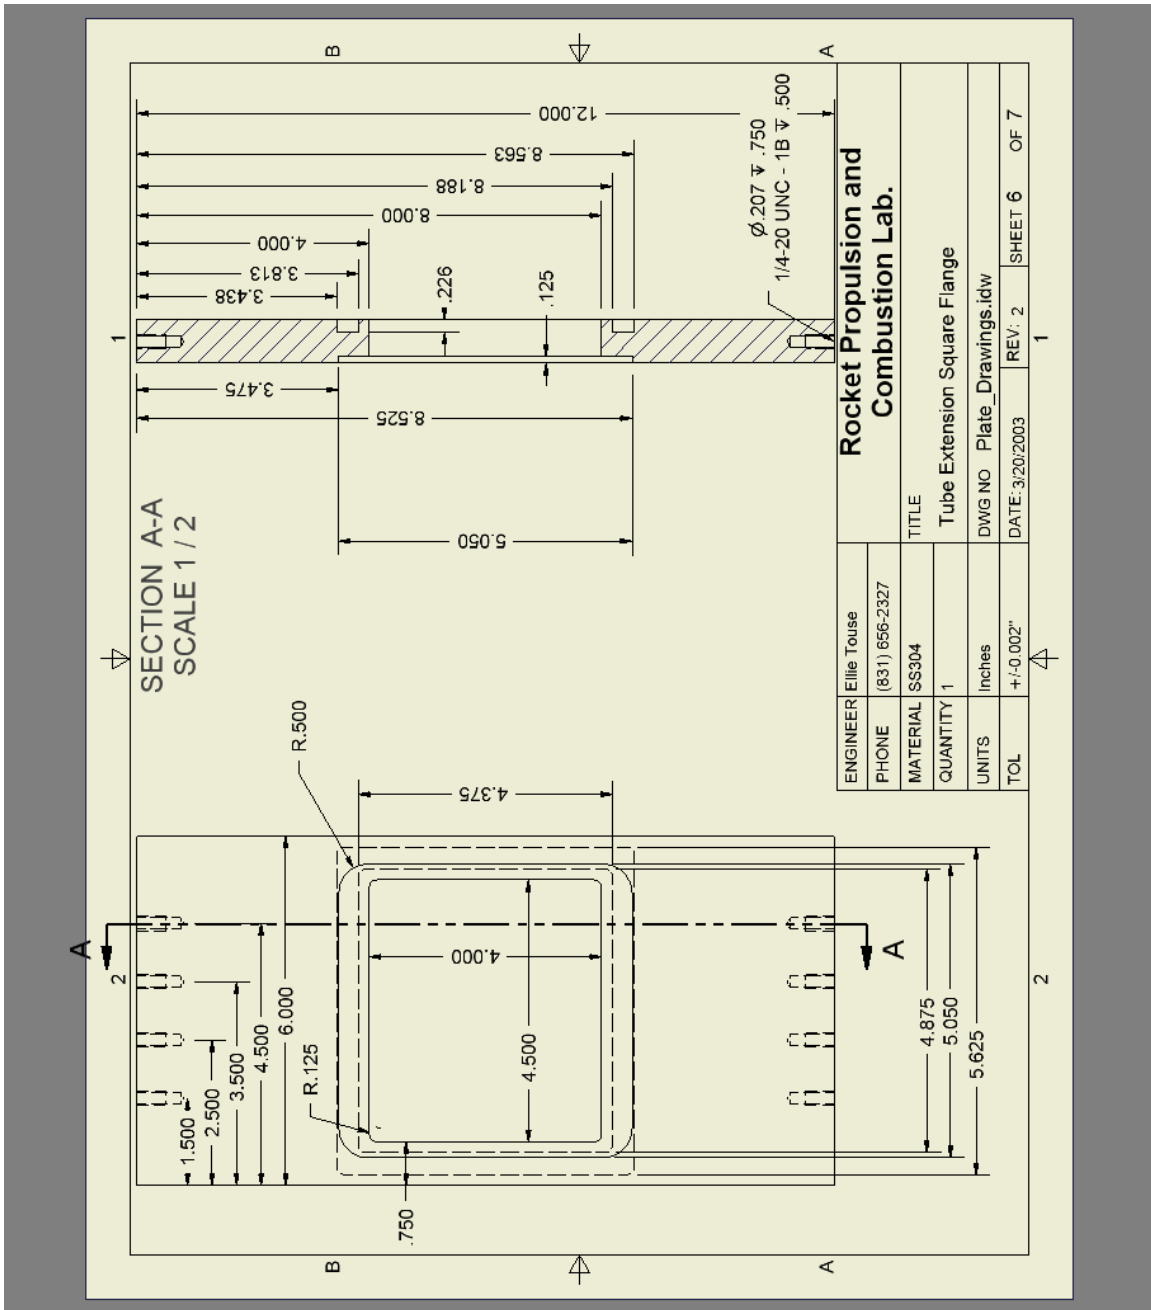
Flange for Tube Extension of Two-Dimensional Test Section
